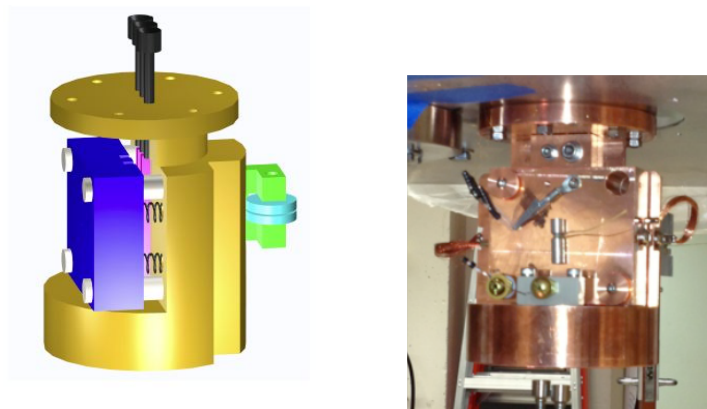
Left: A model of a single thermalizer clamp assembly. Right: A photograph of a production clamp mounted in a test stand.
